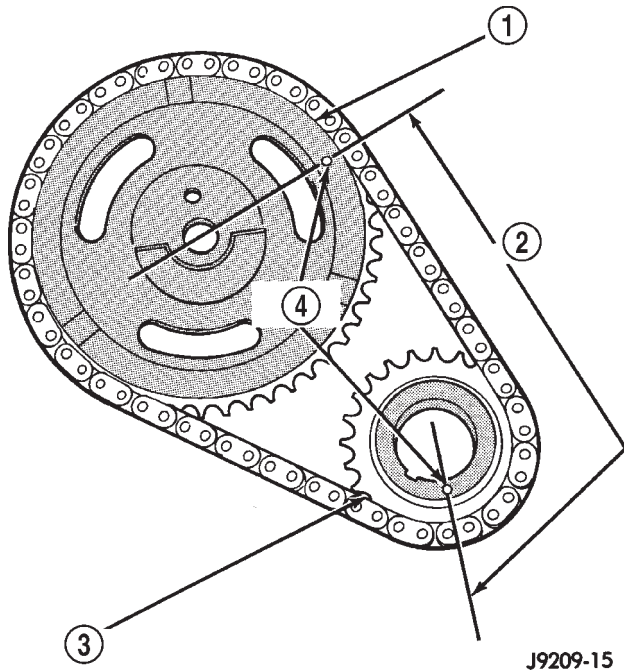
Camshaft and Crankshaft Sprocket and Chain
